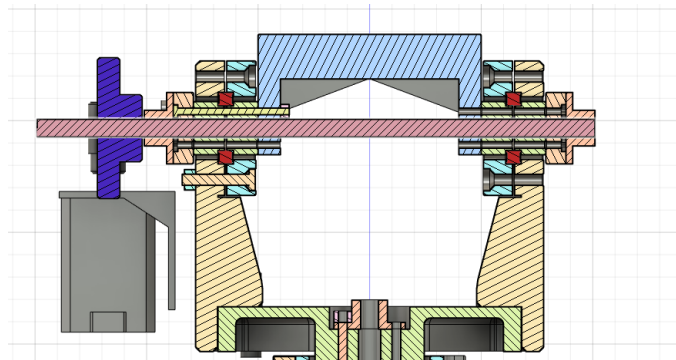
Cross-sectional View of Early Design of Pitch Angle Adjustment Mechanism
